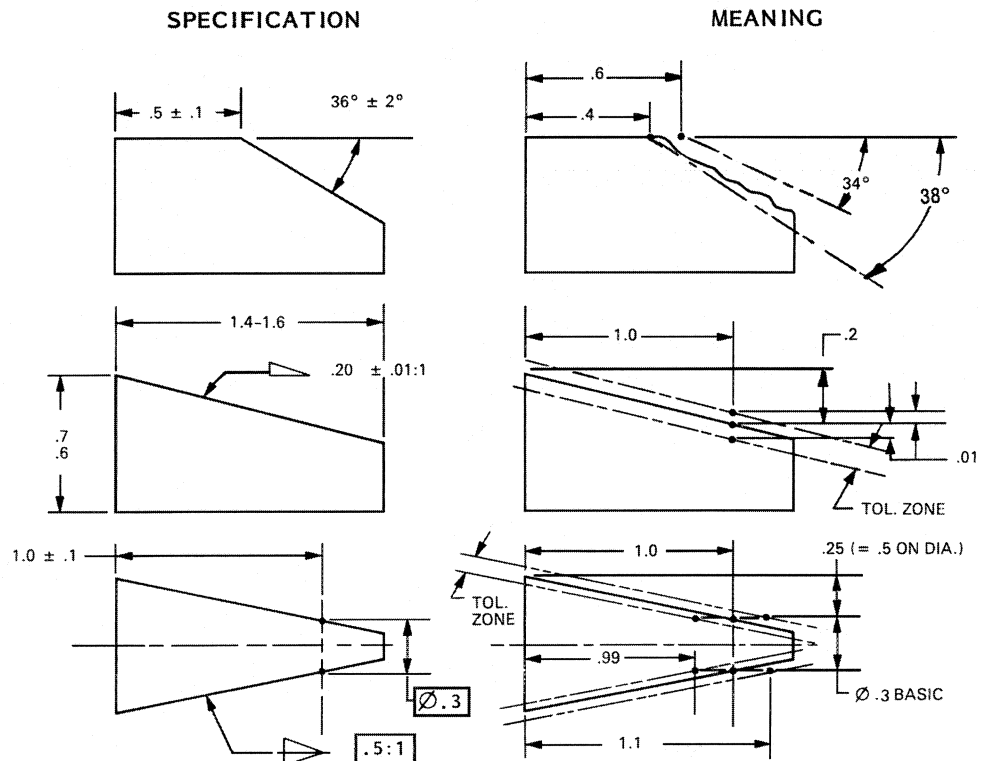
Flat and Conical Taper Tolerance Zones
